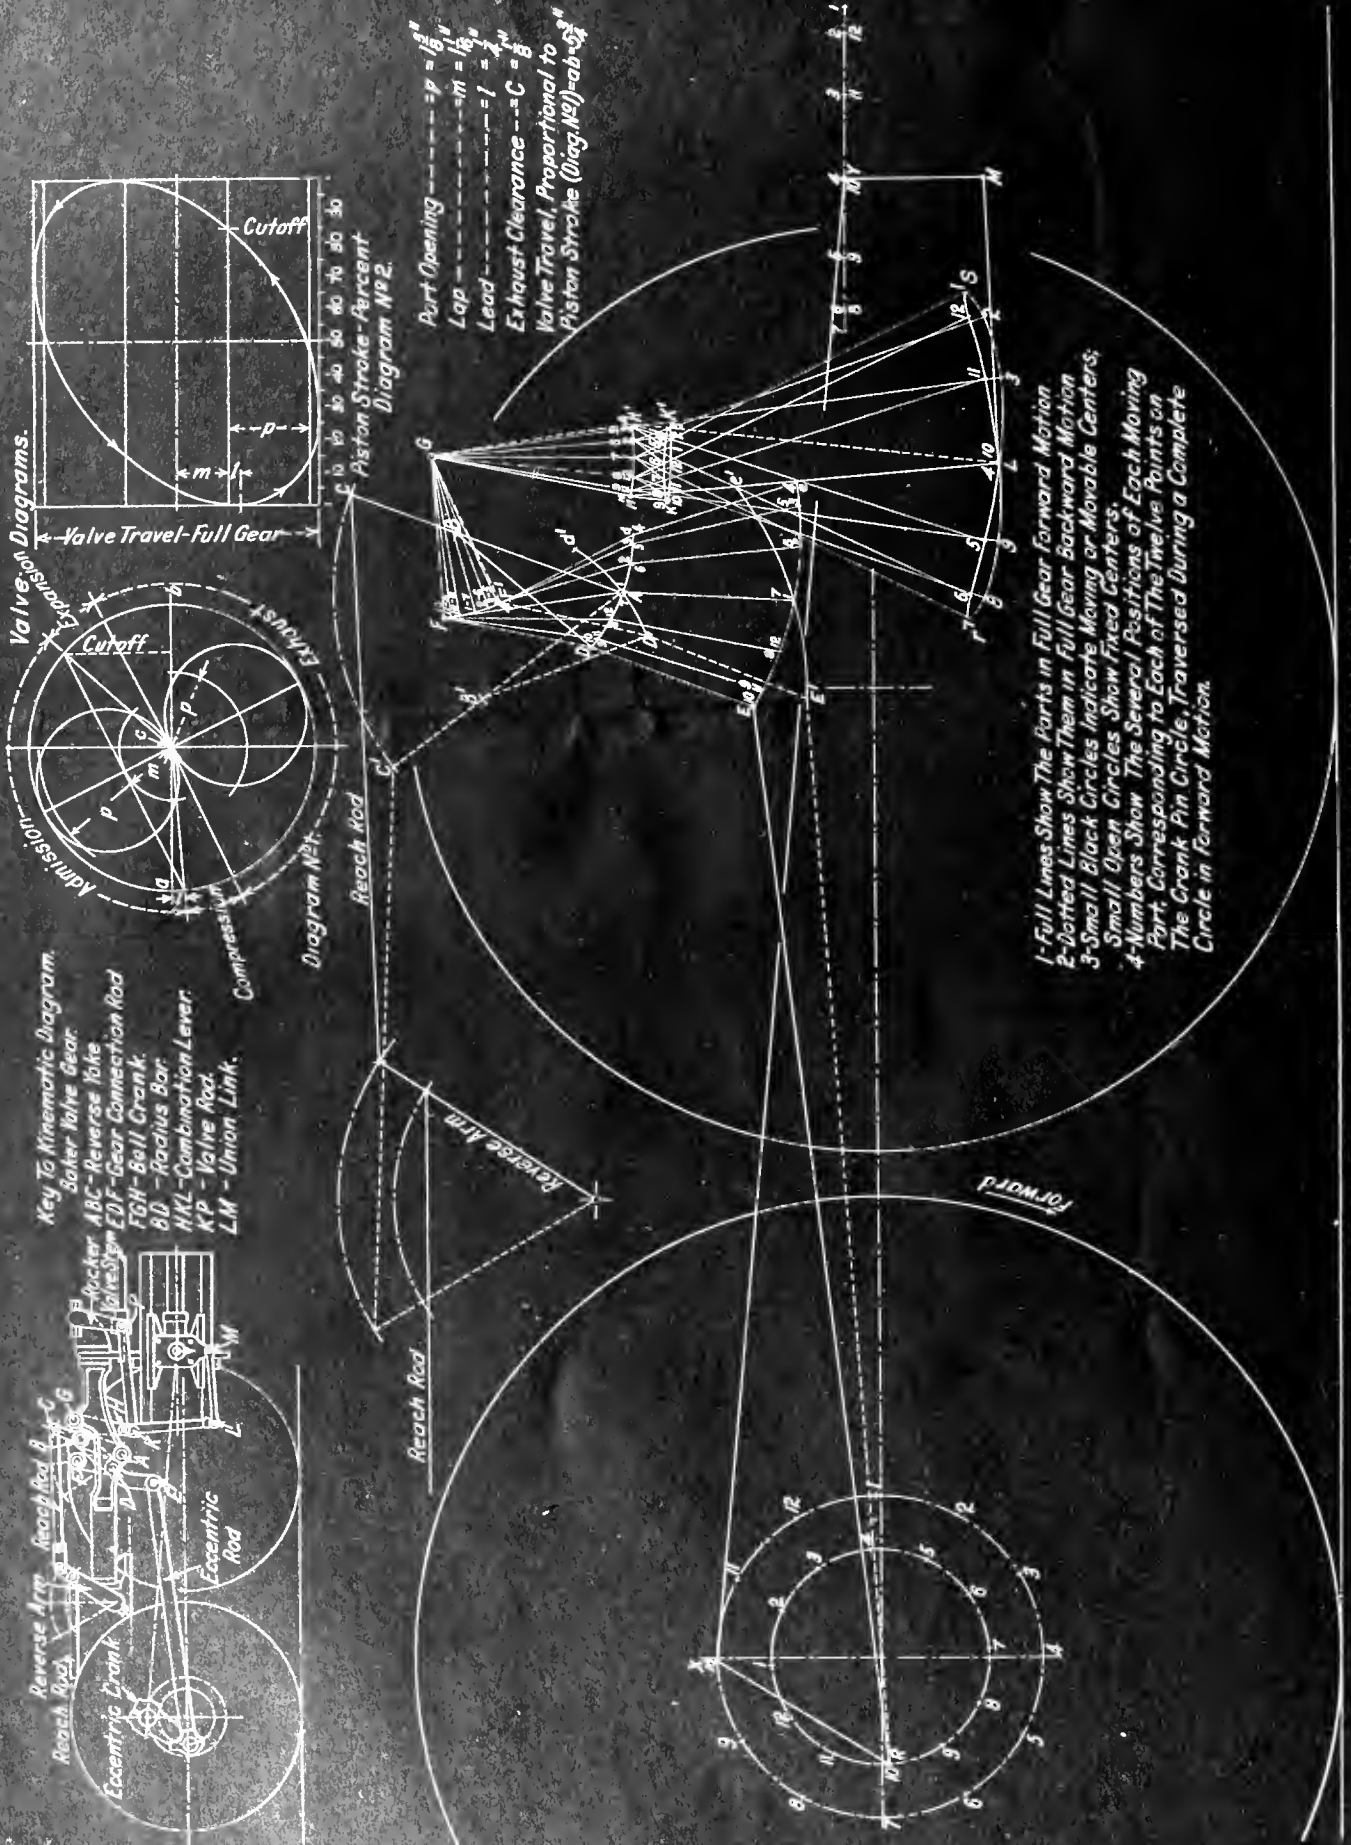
Kinematic Diagram of the Baker Valve Gear With Inside Admission Valves.
